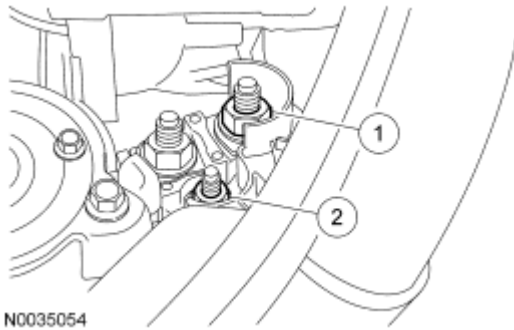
Identifying Battery Cable & Starter Solenoid Terminal Nut
